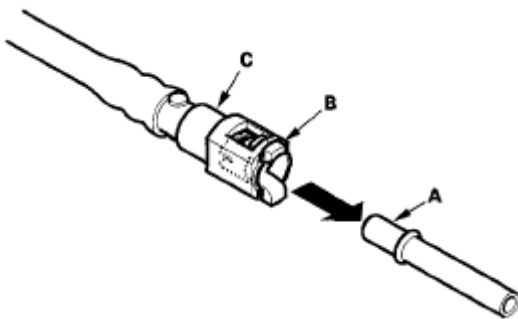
Identifying Fuel Tube/Quick-Connect Fitting Assembly
